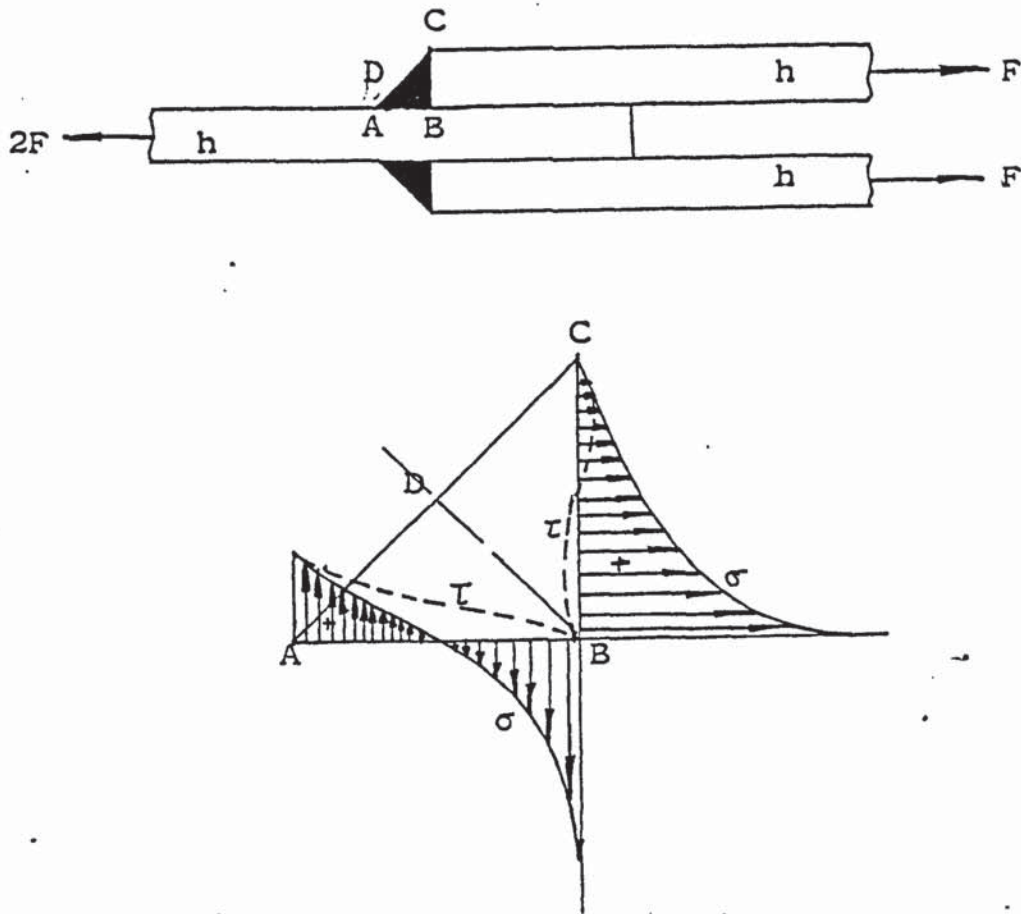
(a) Transverse fillet weld specimen tested by Norris
